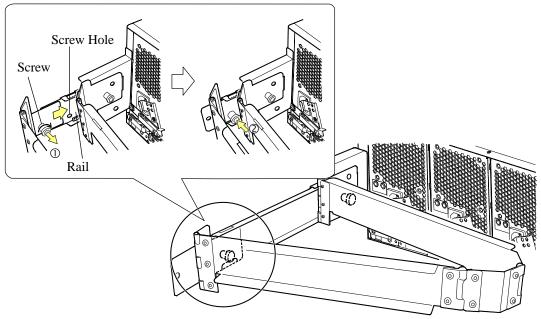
Installation of Cable Routing Bar Installation Part
